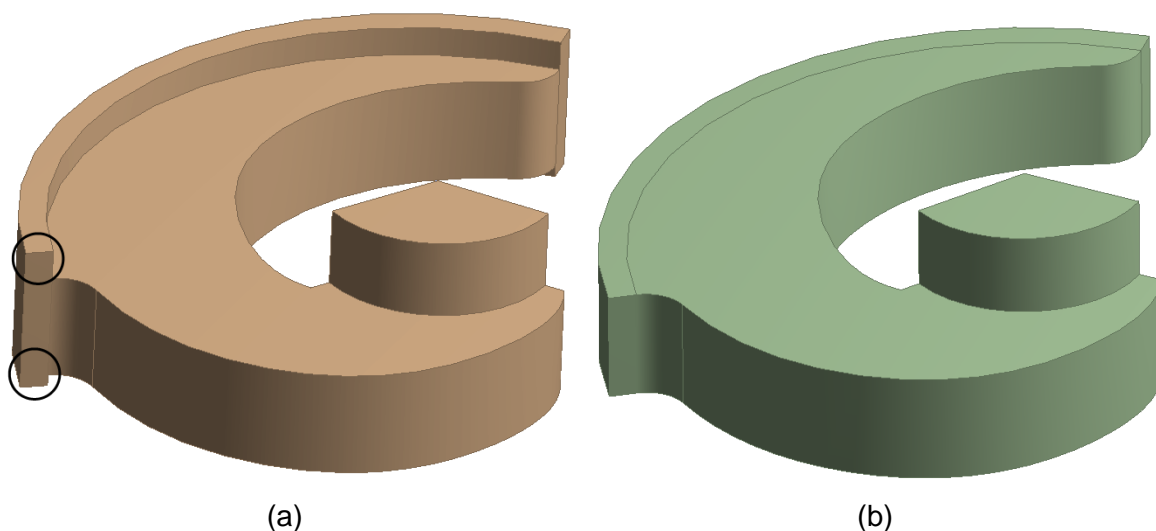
(a) Full model impeller; (b) Single vane model impeller
